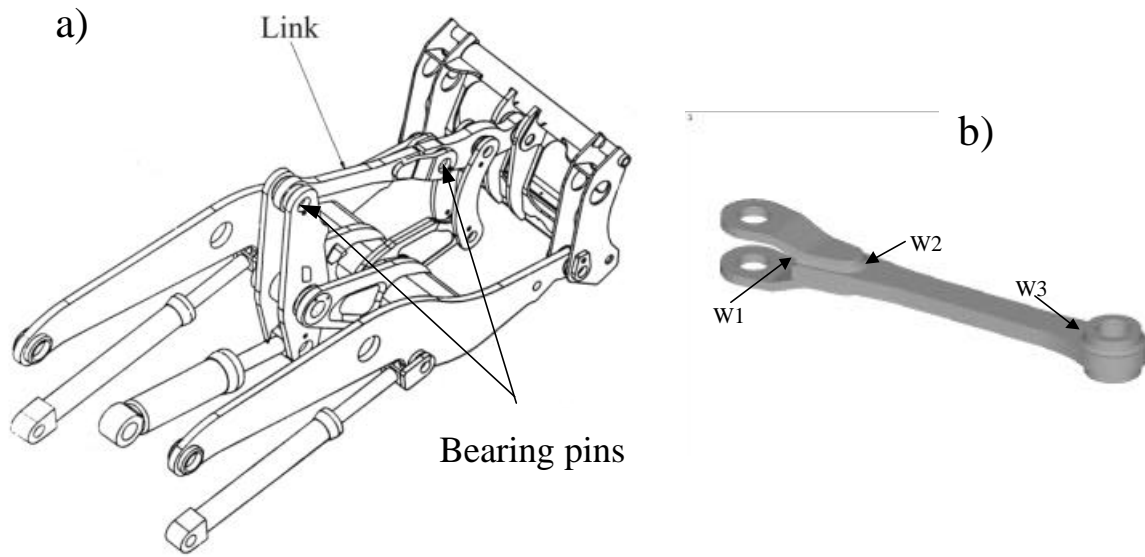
Schematic picture of the placement of the link and the critical welds. W1-W3 are the welds that will be investigated according to fatigue.
